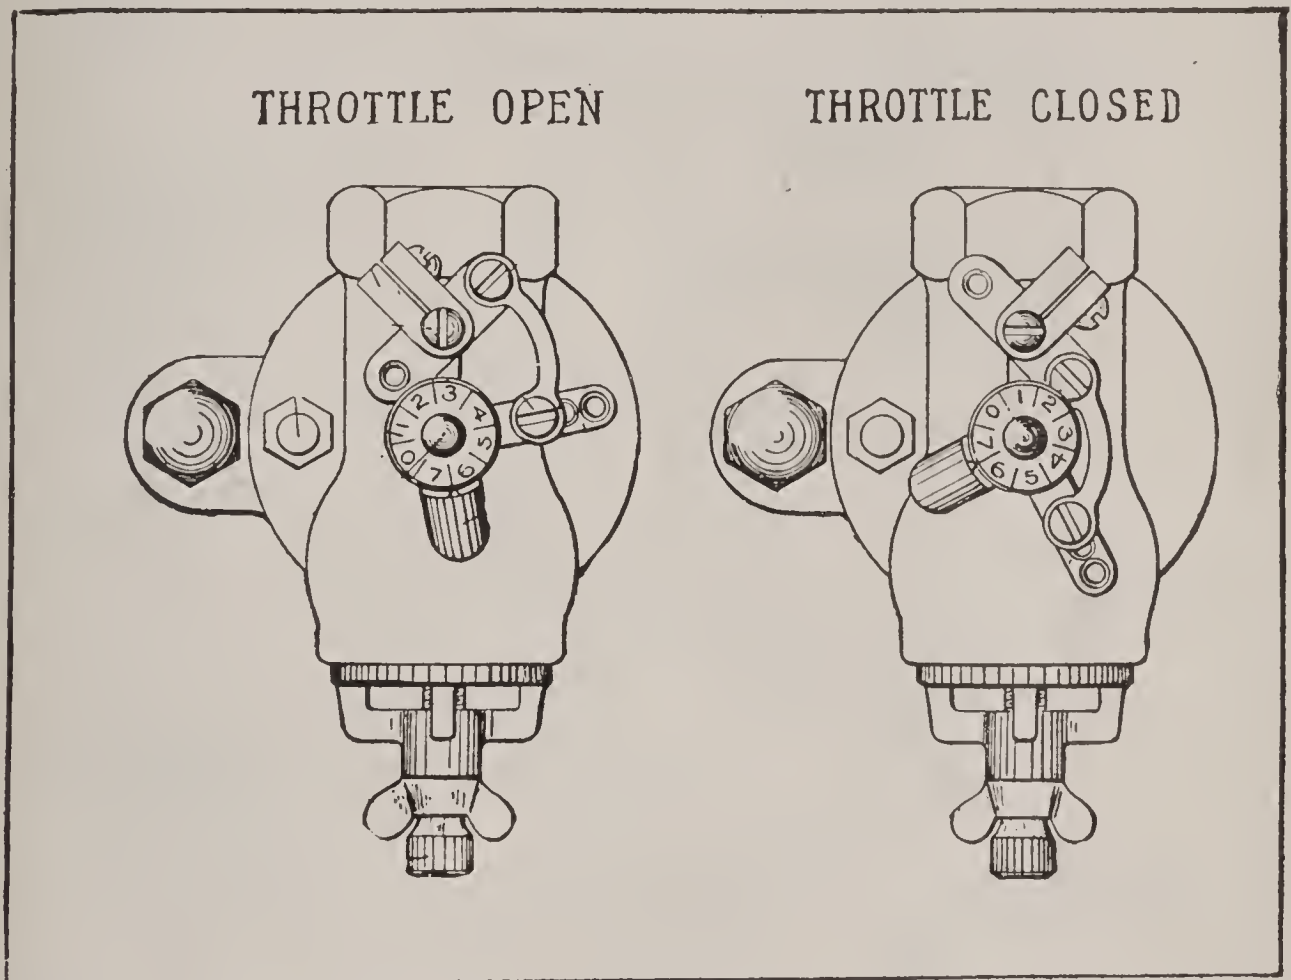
Top Views of Breeze Motorcycle Carburetor, Showing Mechanical Interlock Between Throttle and Mixture Regulating Needle.
